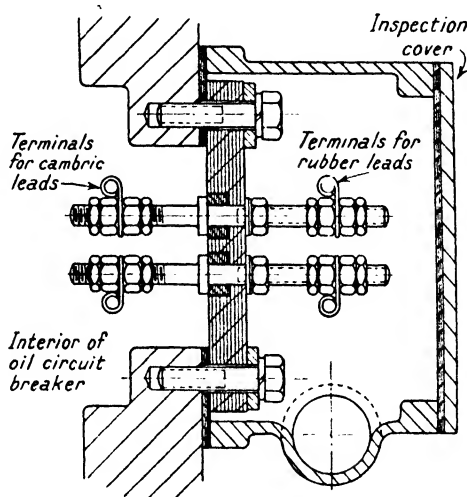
TERMINAL BOARD FOR THE INTERCONNECTION BETWEEN A BUSHING TYPE CURRENT TRANSFORMER MOUNTED IN AN OIL CIRCUIT-BREAKER AND THE INTERCONNECTING CABLES
